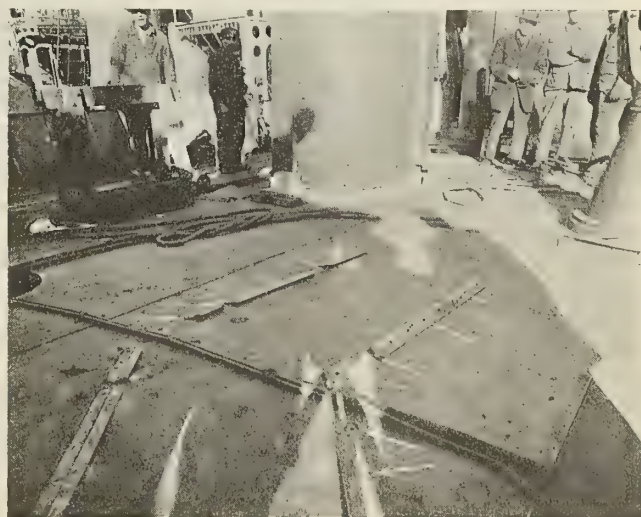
Cocoa Matting Holders Welded to Deck
